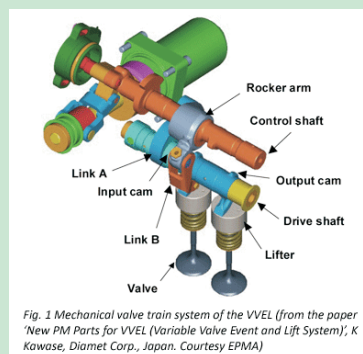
Mechanical valve train system of the VVEL (from the paper 'New PM Parts for VVEL (Variable Valve Event and Lift System)', K Kawase, Diamet Corp., Japan. Courtesy EPMA)
